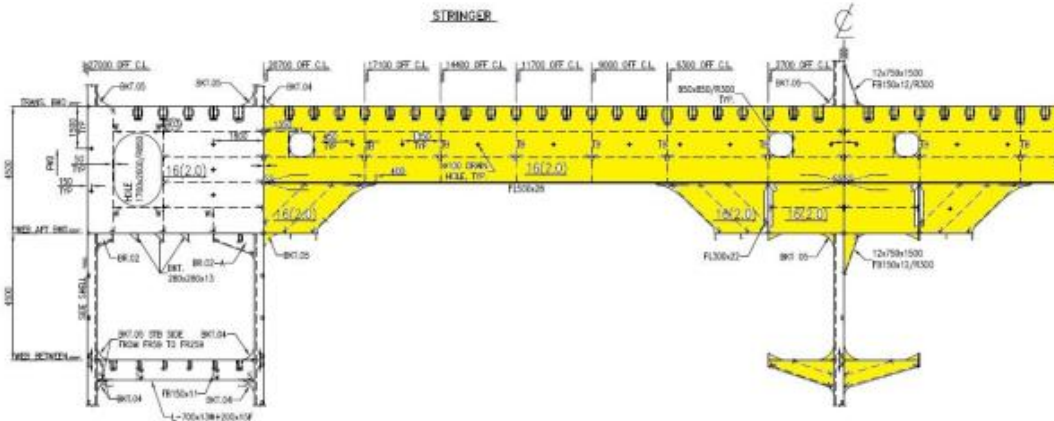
Transverse bulkheads (horizontal stringers & brackets) – Top view
